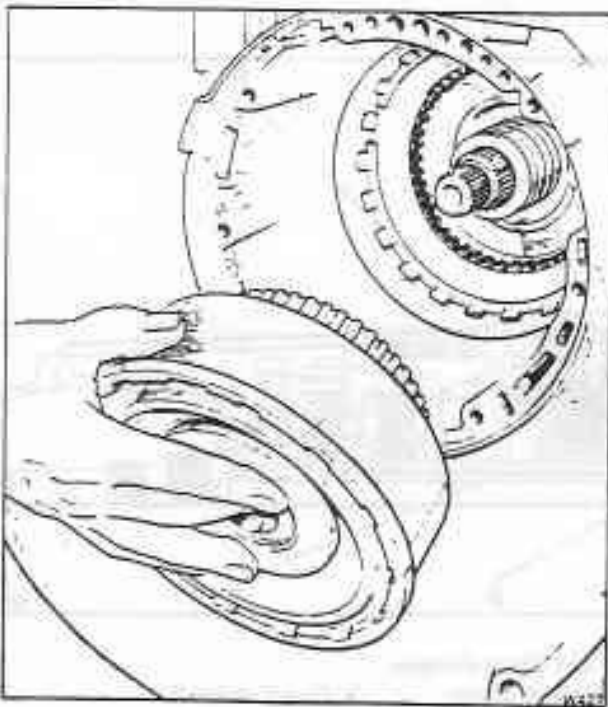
Removing the direct clutch and intermediate sprag assembly
